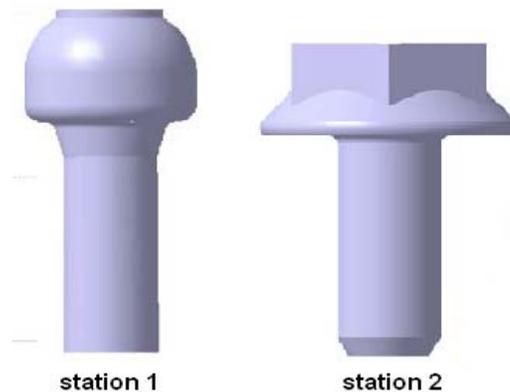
Initial 3D models of the bolt design with two-station forging sequence.
